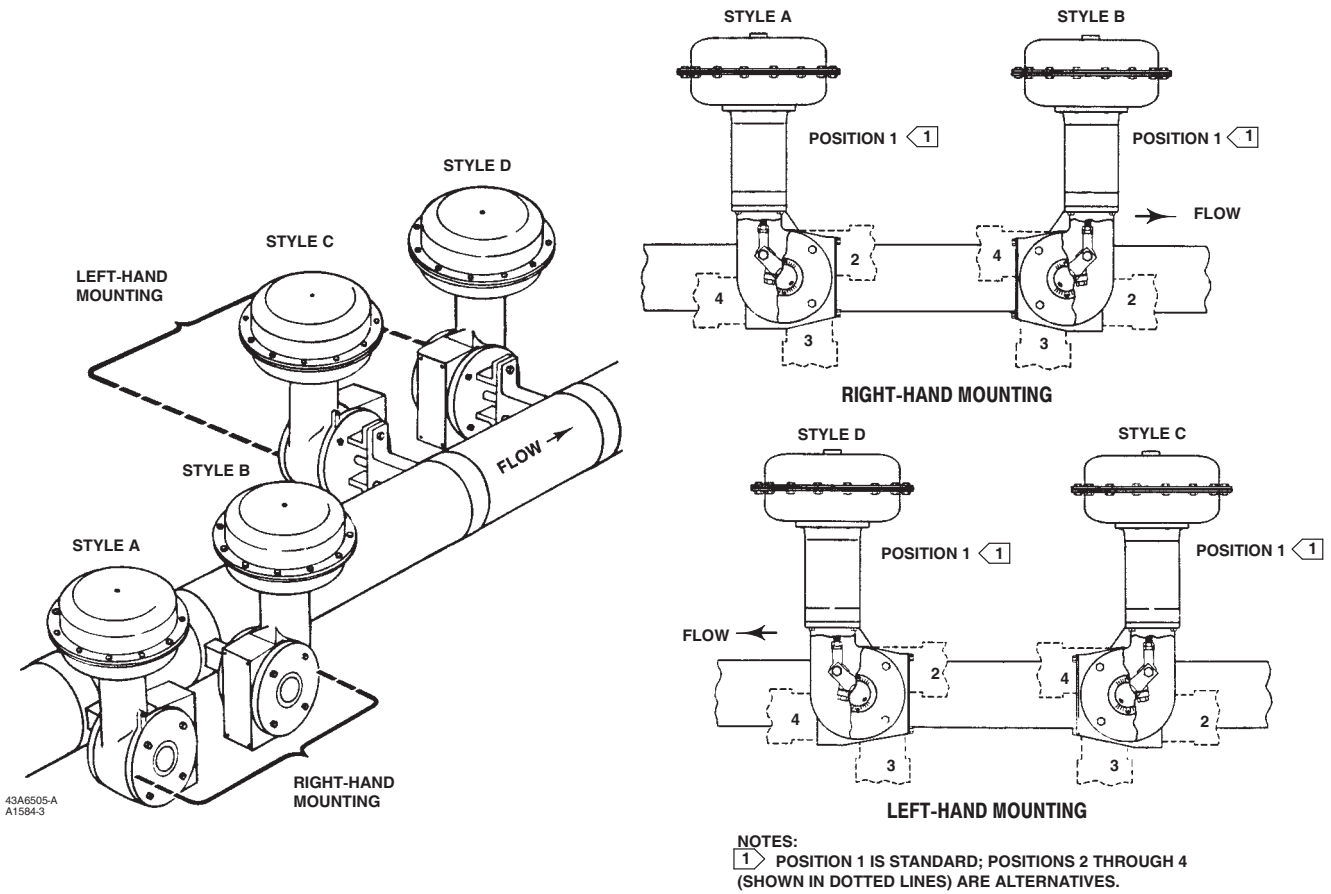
Actuator Mounting Styles and Positions (also see table 7)
